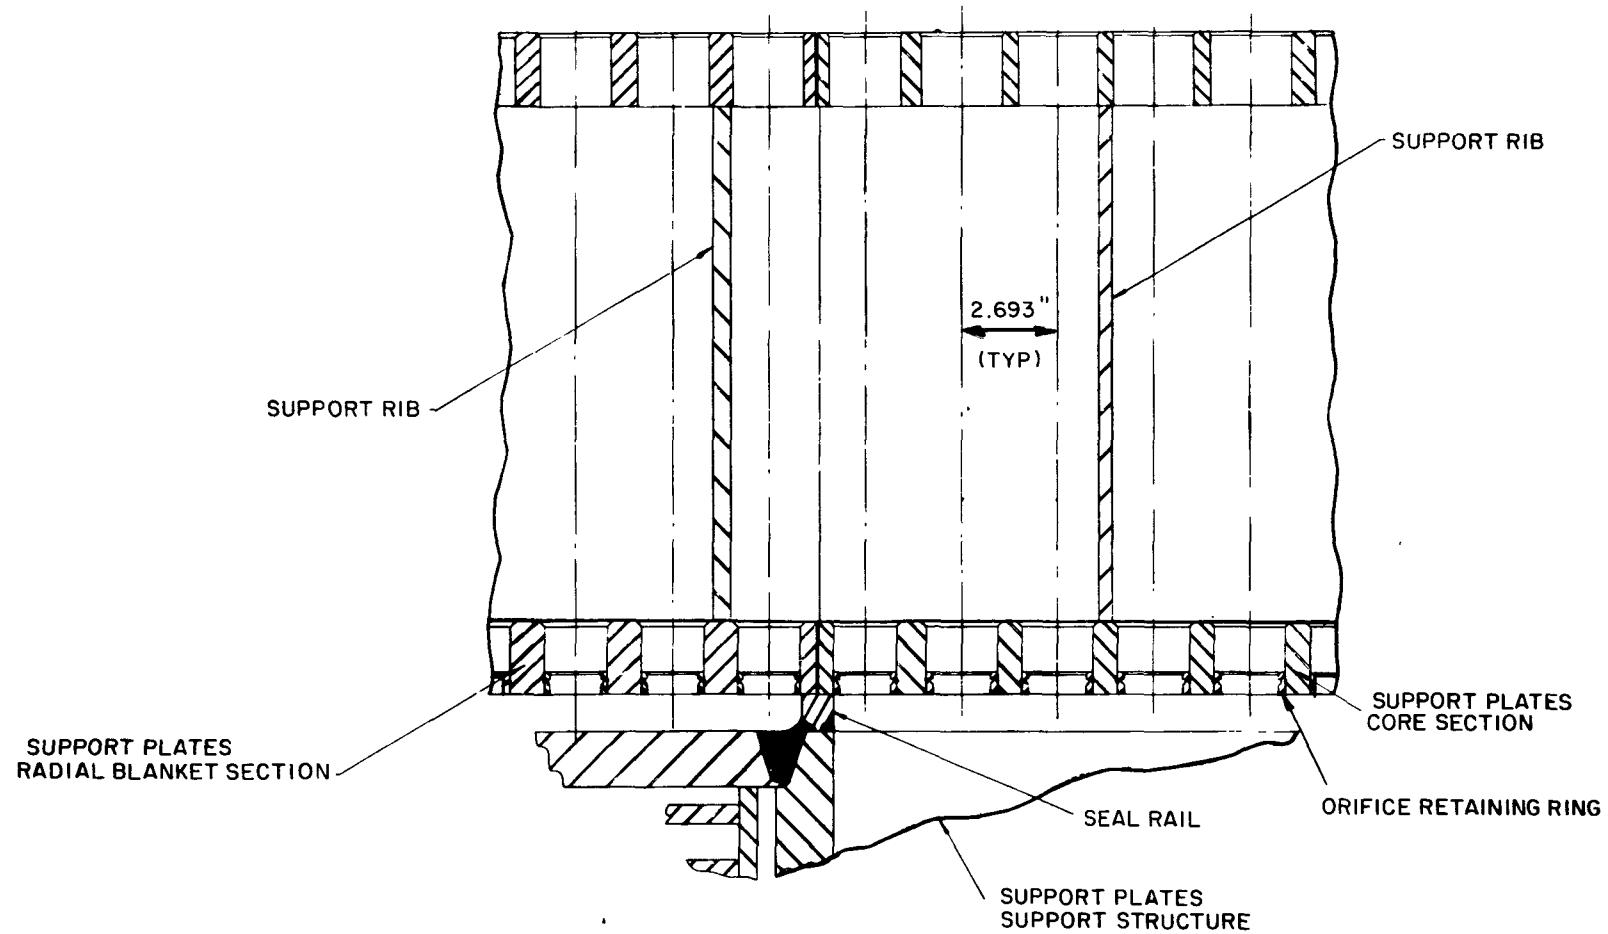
PARTIAL SECTION THROUGH SUPPORT PLATES
